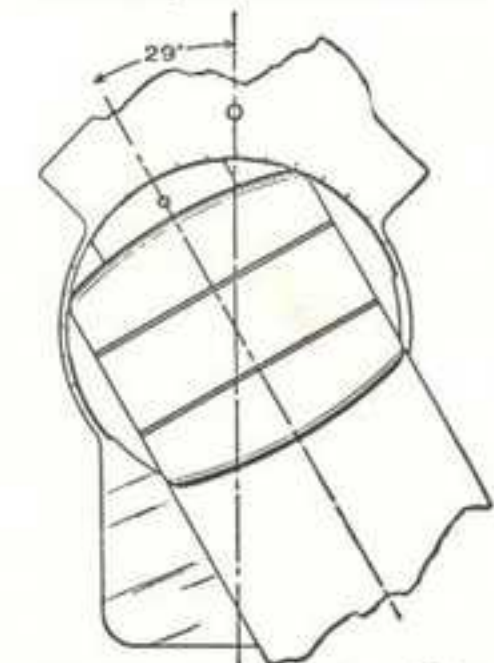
Correct Angle of Compound Rest for Thread Cutting
